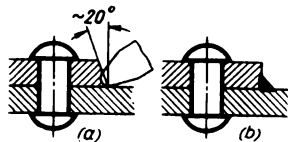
Calking (a) and welding up (b) of edges
